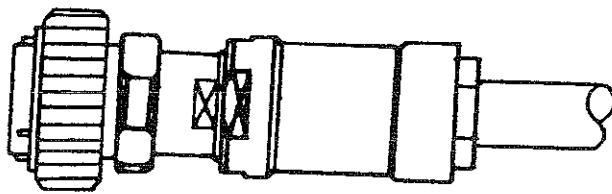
ASSEMBLE GLAND NUT AND SEAL
